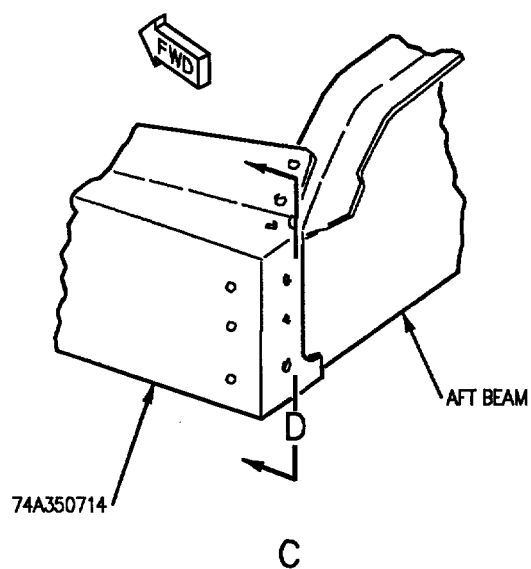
Inspection or Replacement - Aft Beam (Sheet 2)
